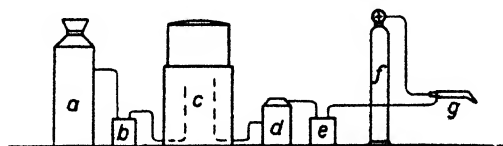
Lay-out of an acetylene welding plant
